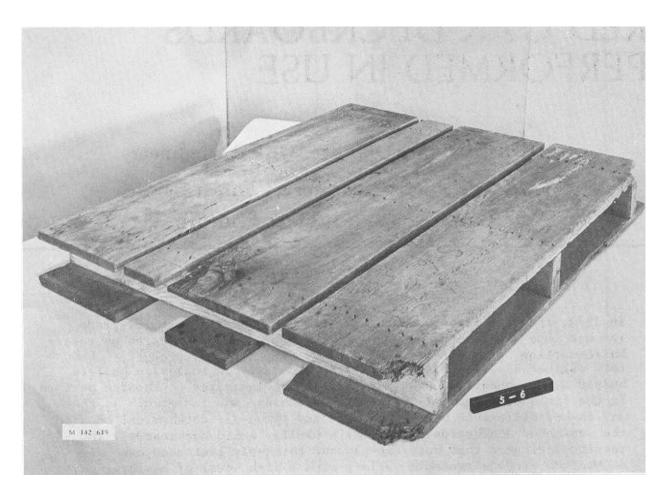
The serviceable condition shown is typical of laminated deckboard pallets assembled with either staples or nails after 18 months' use in a cement block and brick yard followed by a free-fall-on-corner drop test. (Note crushed deckboard corners from the free-fall-on-corner test.)
